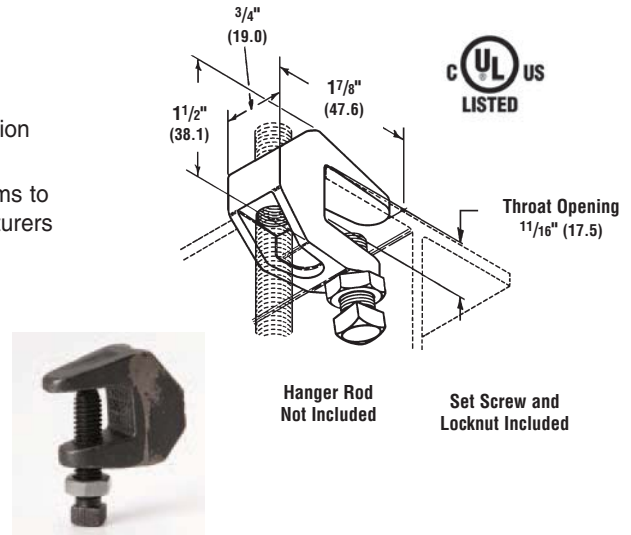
Wide Jaw Reversible C-Clamp (TOLCO Fig. 68 & Fig. 68W)
